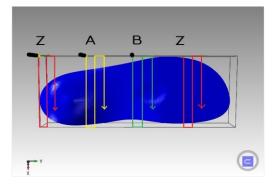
The working area of the insole model file for the 3-milling head toolpath in 4 section
